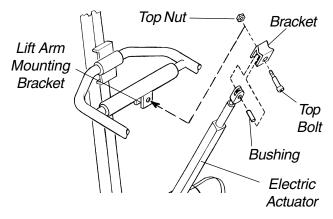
ATTACHING ELECTRIC ACTUATOR TO MAST
